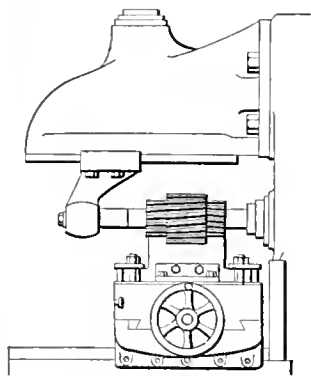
Vertical Head Reversed to provide Outboard Support for Arbor in Horizontal Milling.
